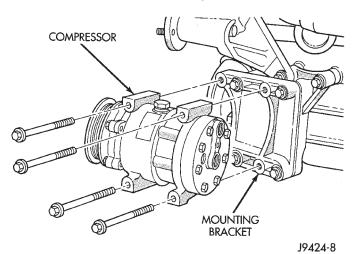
Compressor and Mounting Bracket (RH Drive Vehicles)
